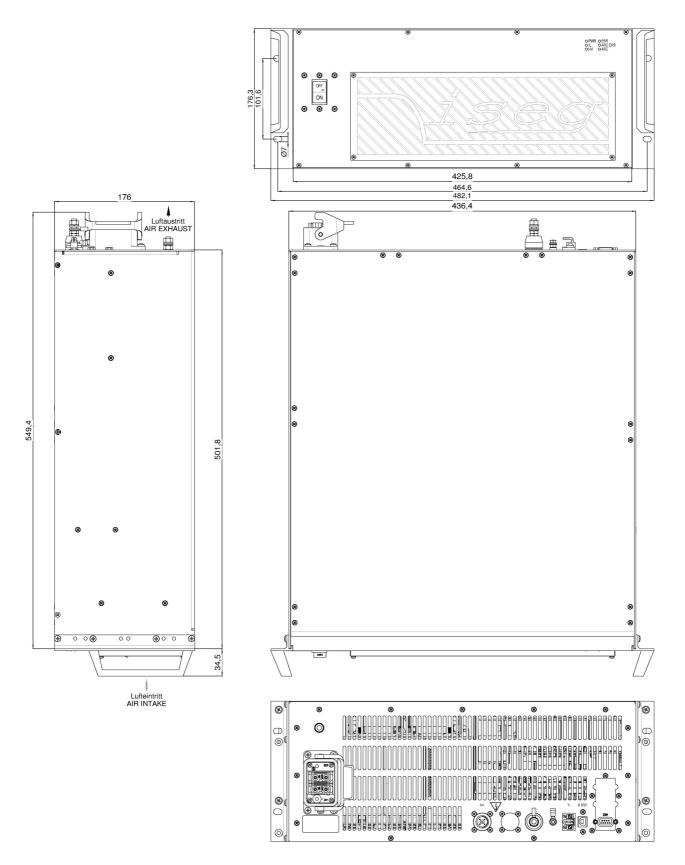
Dimensioned drawing (in mm), standard version of the rear panel
